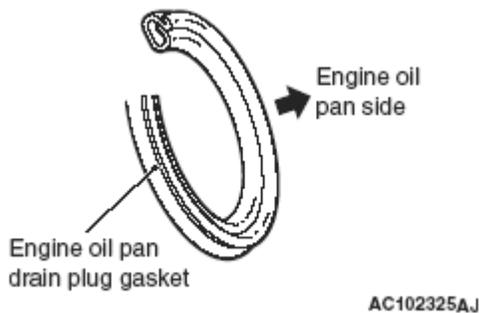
Installing Engine Oil Pan Drain Plug Gasket
